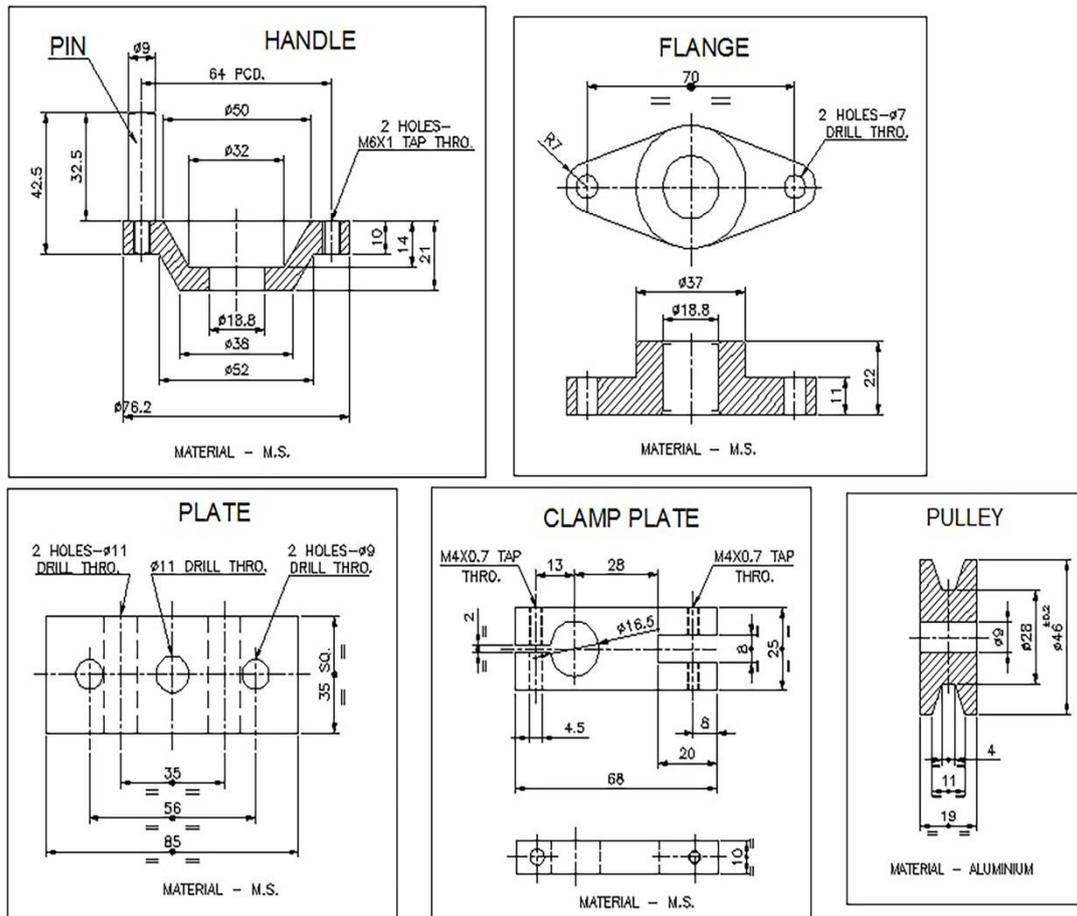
Handle, Plate, Flange, Clamping plate and Pulley
